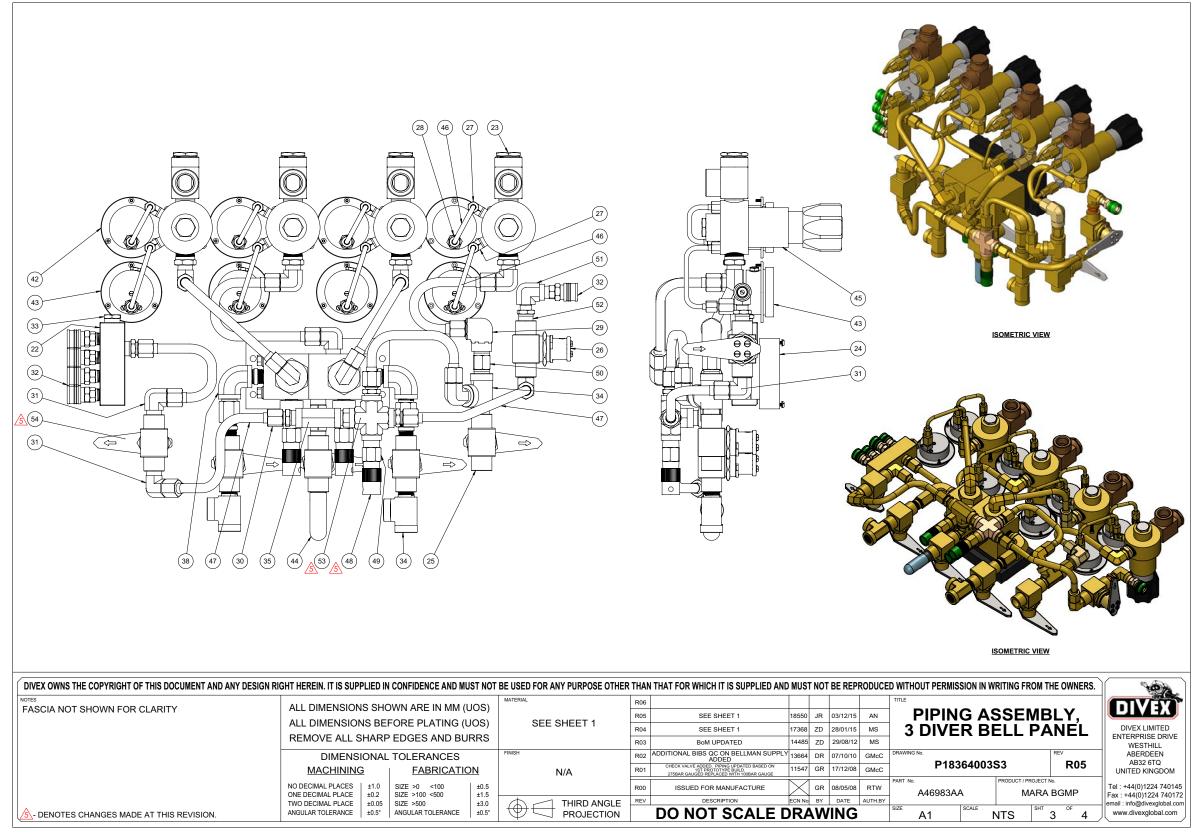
Gas Management Panel, Piping Assembly (Drawing P18364003S3)
